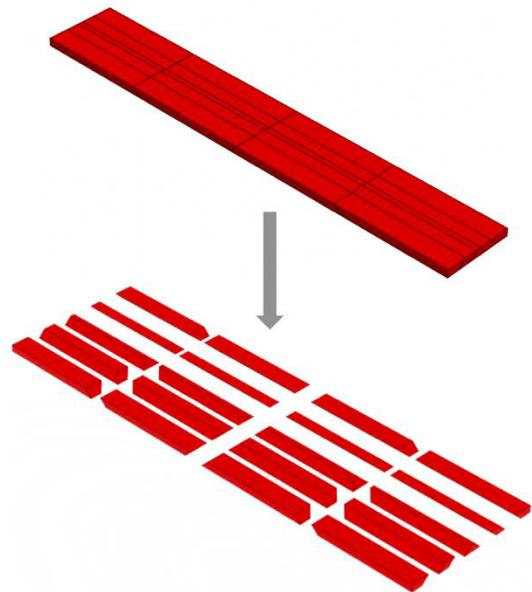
Top: Part showing outline of chunks Bottom: Exploded view of the chunks that were outlined in top image.
